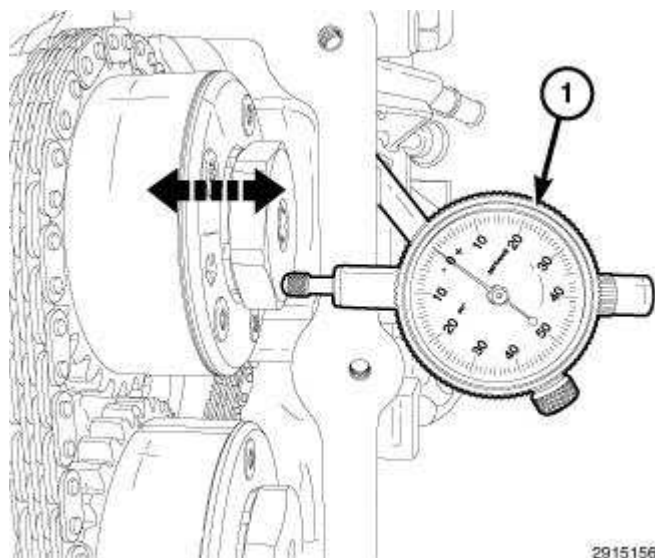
Mount Dial Indicator Set To A Stationary Point At Front Of Engine
